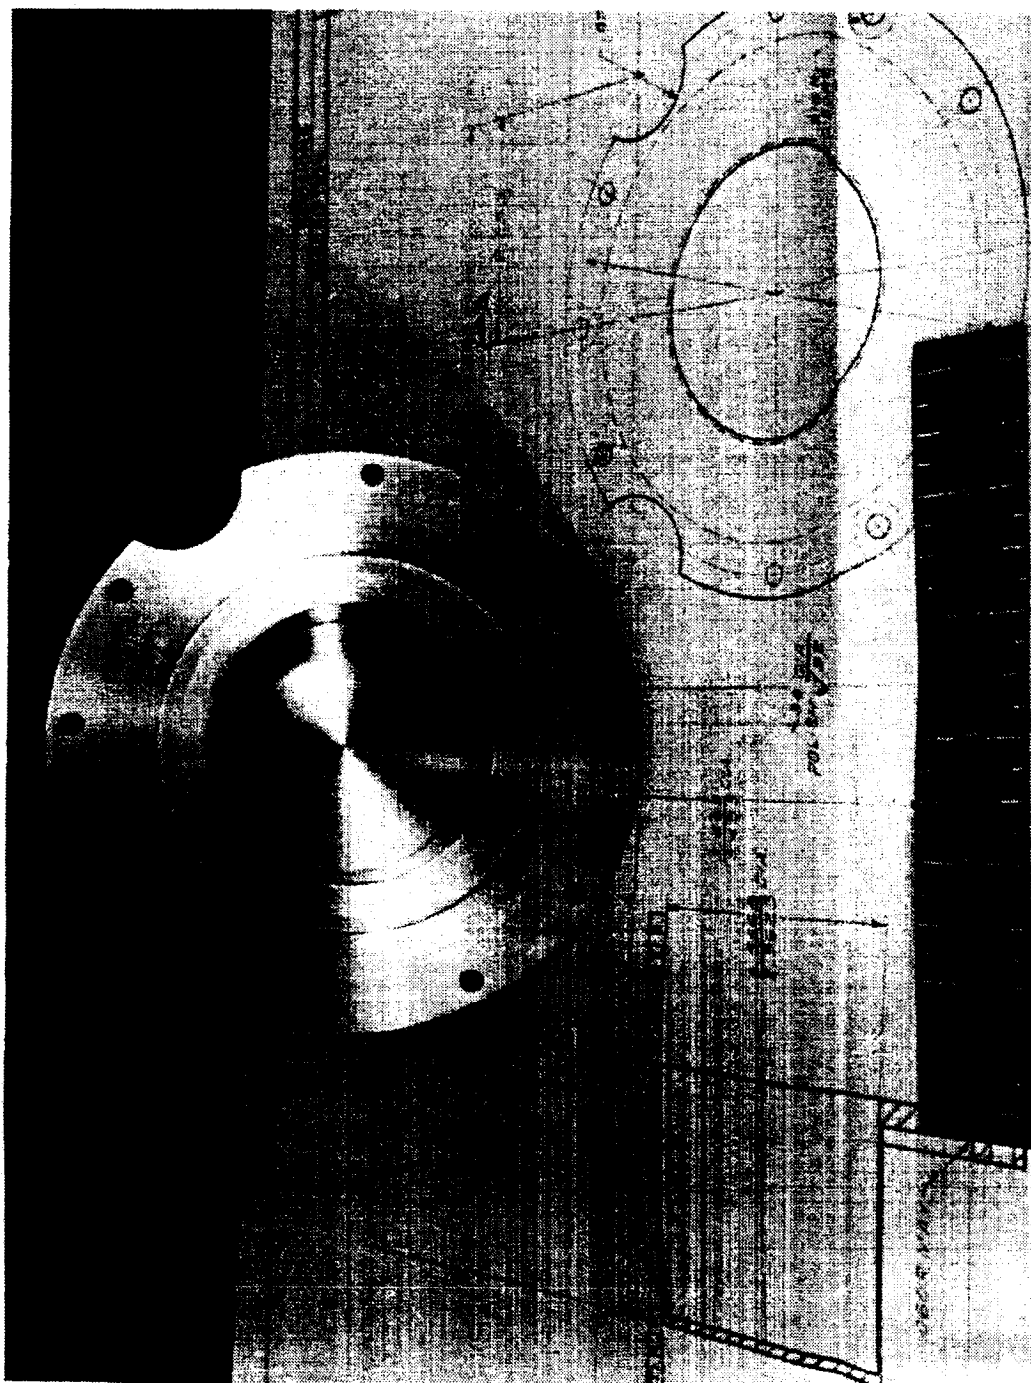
Compressor Drive Motor Hermetic Sleeve
